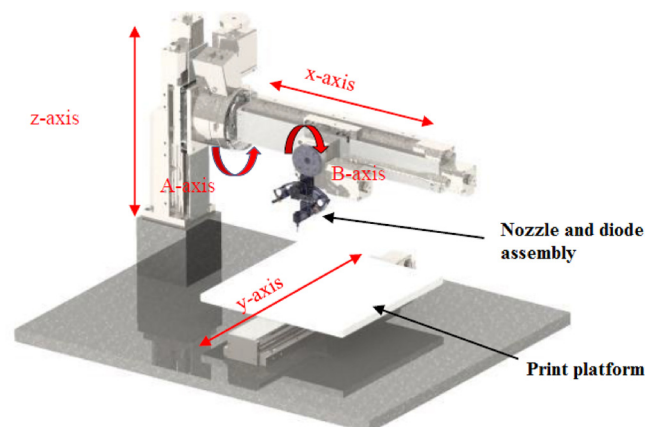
A schematic of the 5 axes photopolymer extrusion printer.
